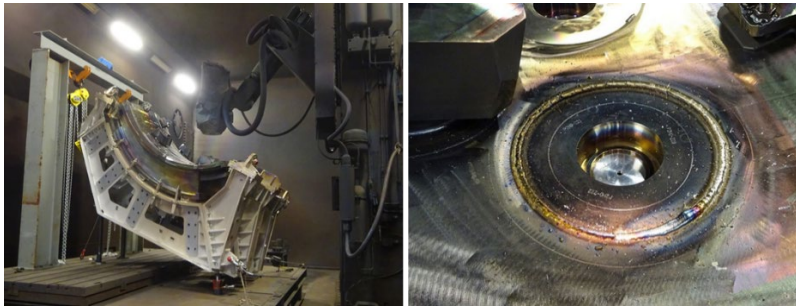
a) PS2 in the vacuum chamber at the EB welding workshop. b) Close-up of the EB weld –
